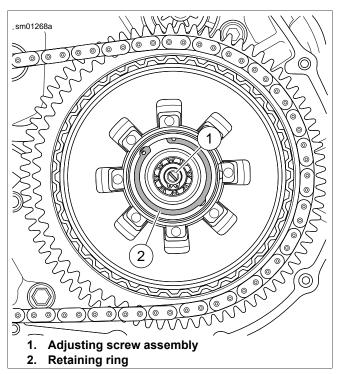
Clutch Adjusting Screw Assembly and Retaining Ring
